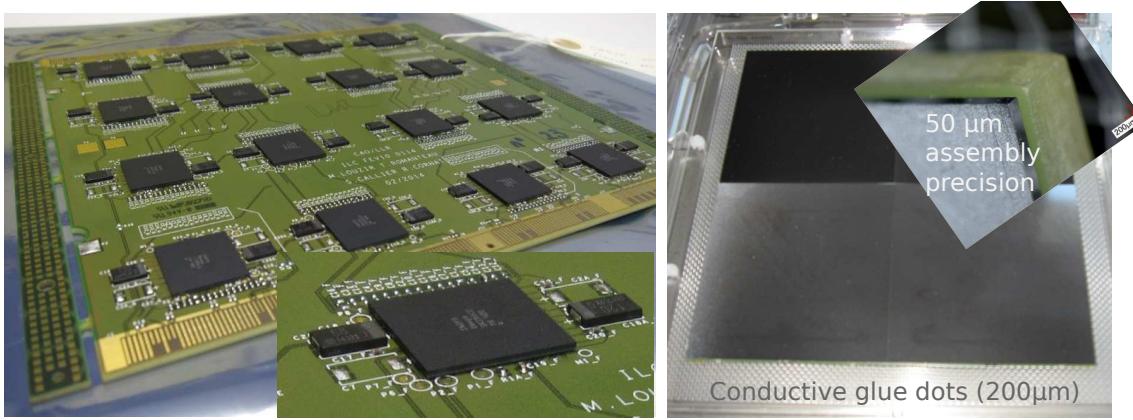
Left: new PCB with 16 SKIROC chips and 1024 channels, right: 4 sensors aligned and prepared for robotic gluing to PCB.
